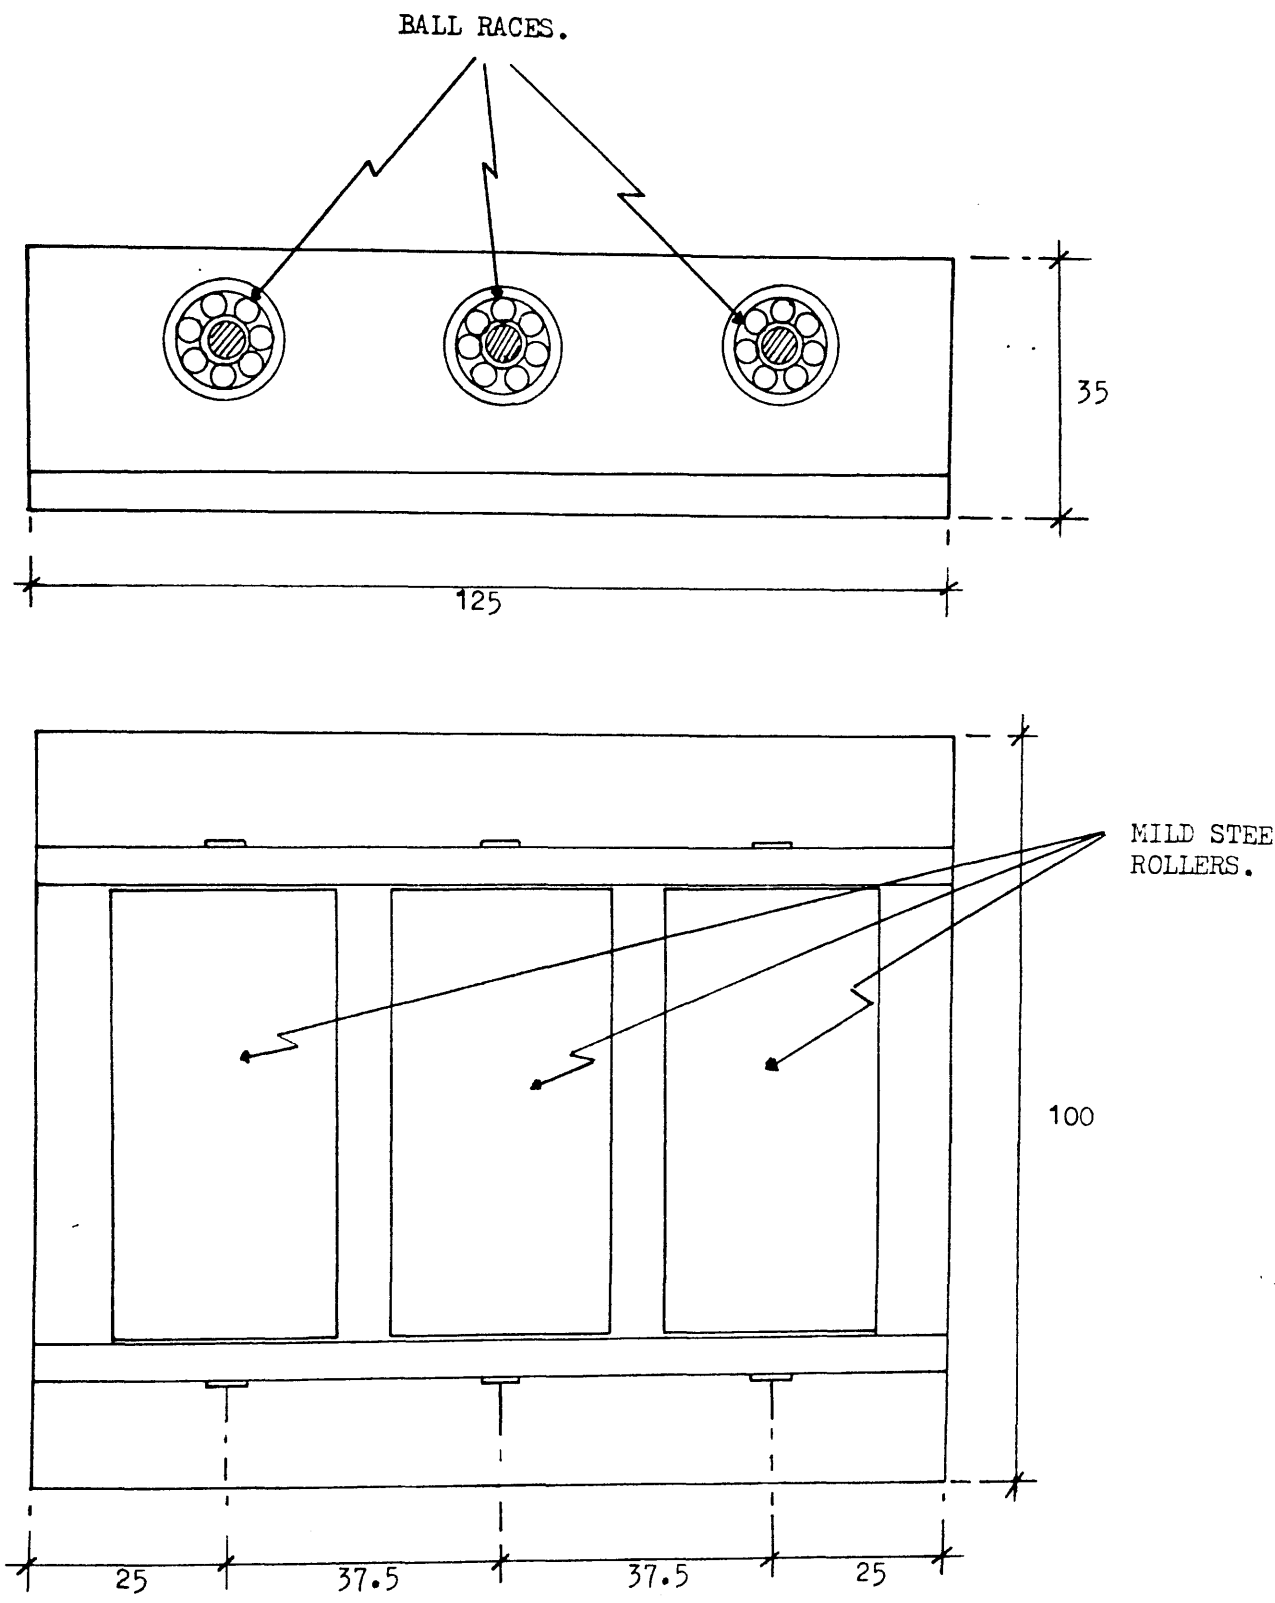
SIDE ELEVATION AND PLAN VIEW OF ROLLER SUPPORT MECHANISM
